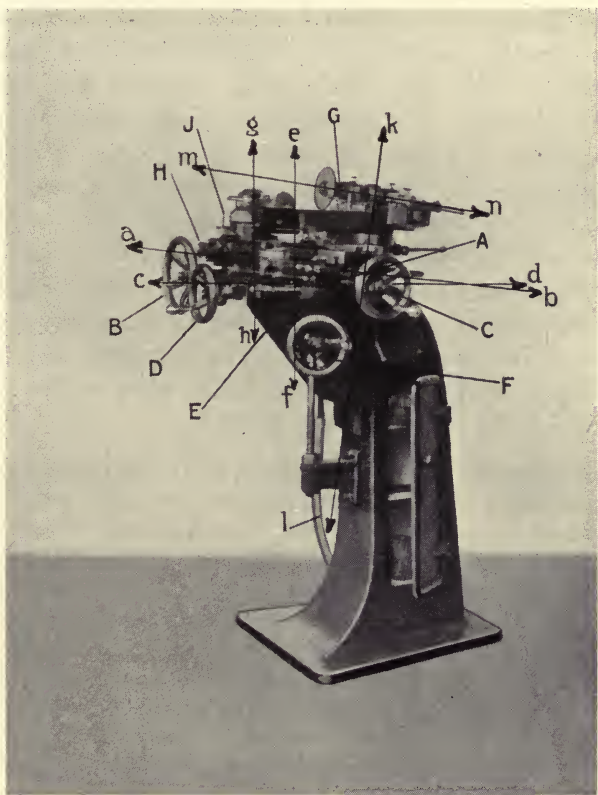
GUEST UNIVERSAL AND CUTTER GRINDER
